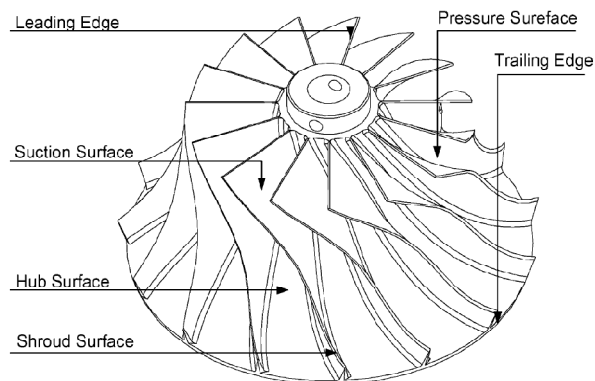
Centrifugal impeller design, common in five-axis machining research [21]
